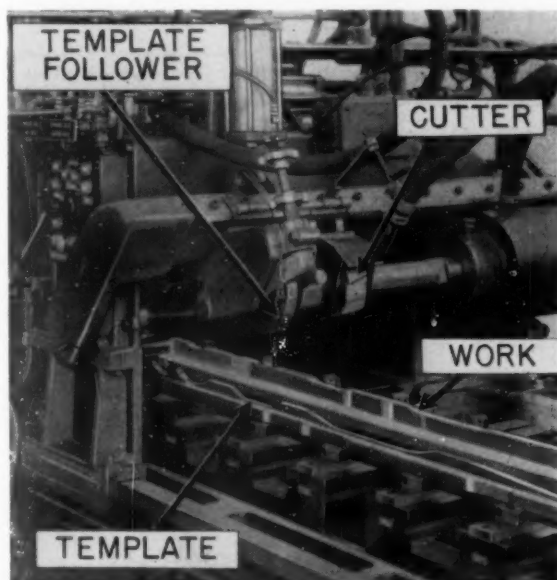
Hydraulic clamps holding an extrusion for milling. Some clamps have swung out of the way of the approaching cutter head.
